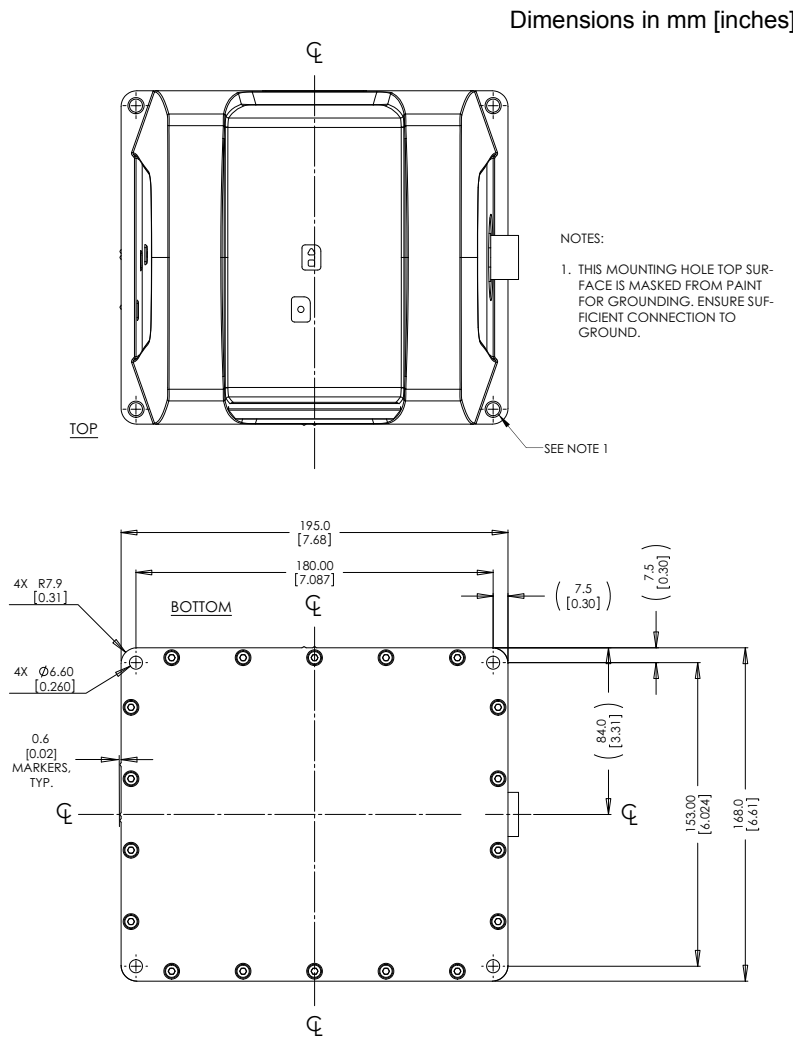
Universal IMU Enclosure Top/Bottom Dimensions
